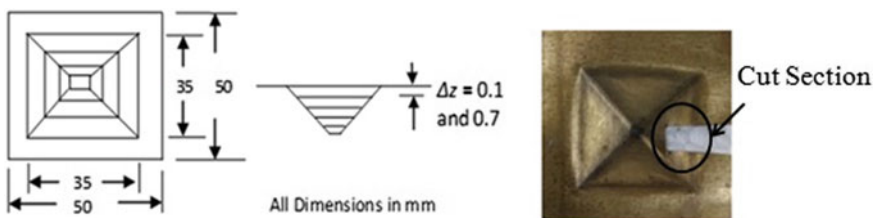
The dimensions of square pyramid and finished part with cut section for test
